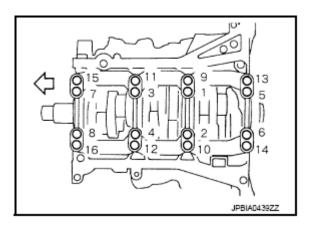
Identifying Tightening Sequence Of Main Bearing Cap Bolts Courtesy of NISSAN NORTH AMERICA, INC.
